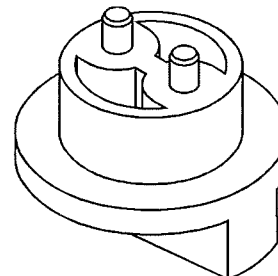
Model VT-1 Wet Valve Tool.
